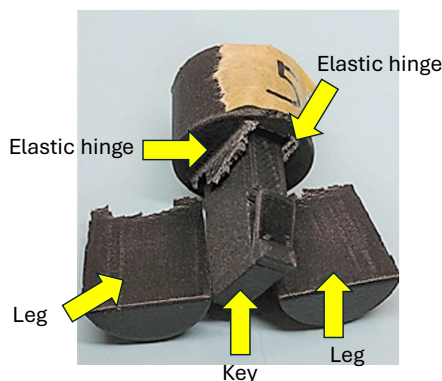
Configuration of the fractured novel fastener after the tensile fracture test.
